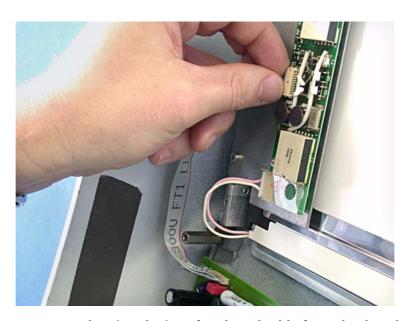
Unplugging the interface board cable from the dc/ac board
